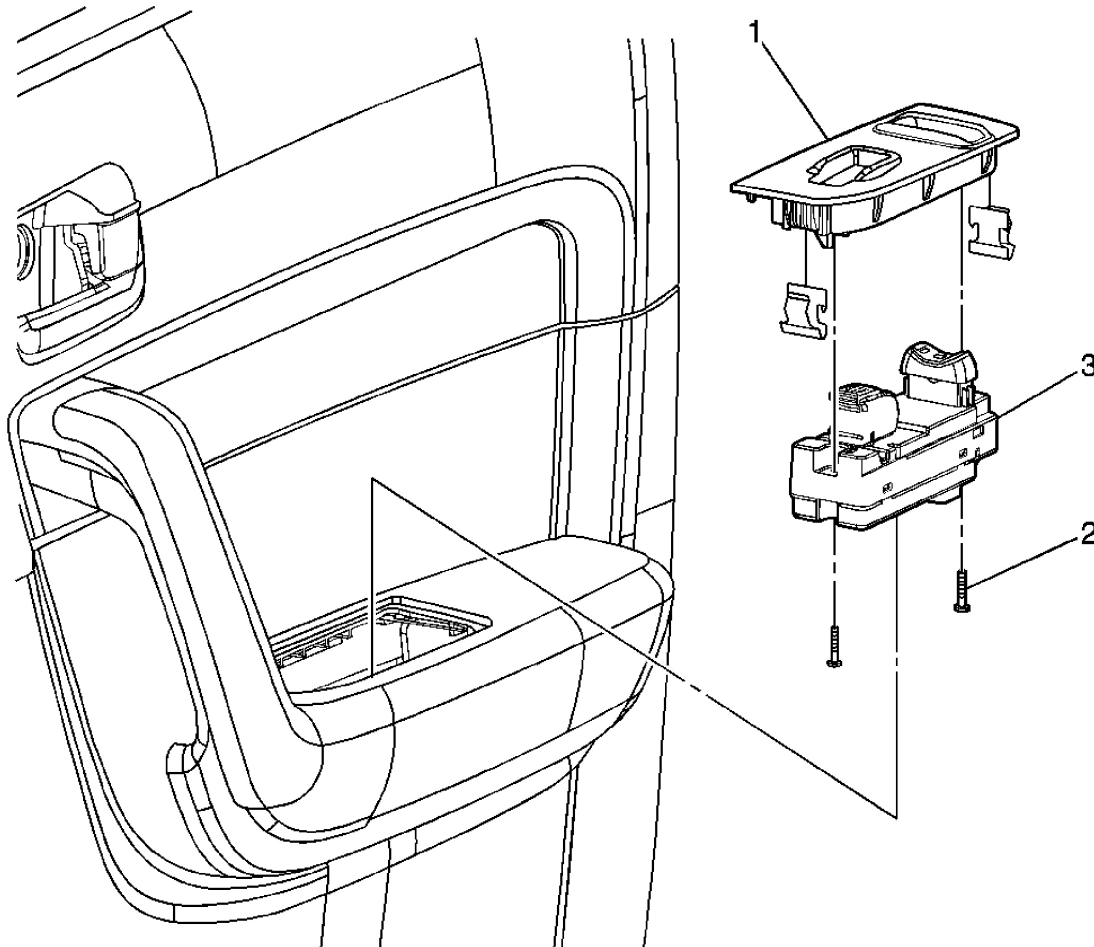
View Of Driver Side Door Lock/Side Window Switch
